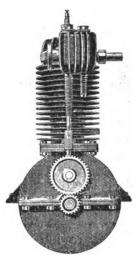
GENERAL VIEW OF DOREY MOTOR.
